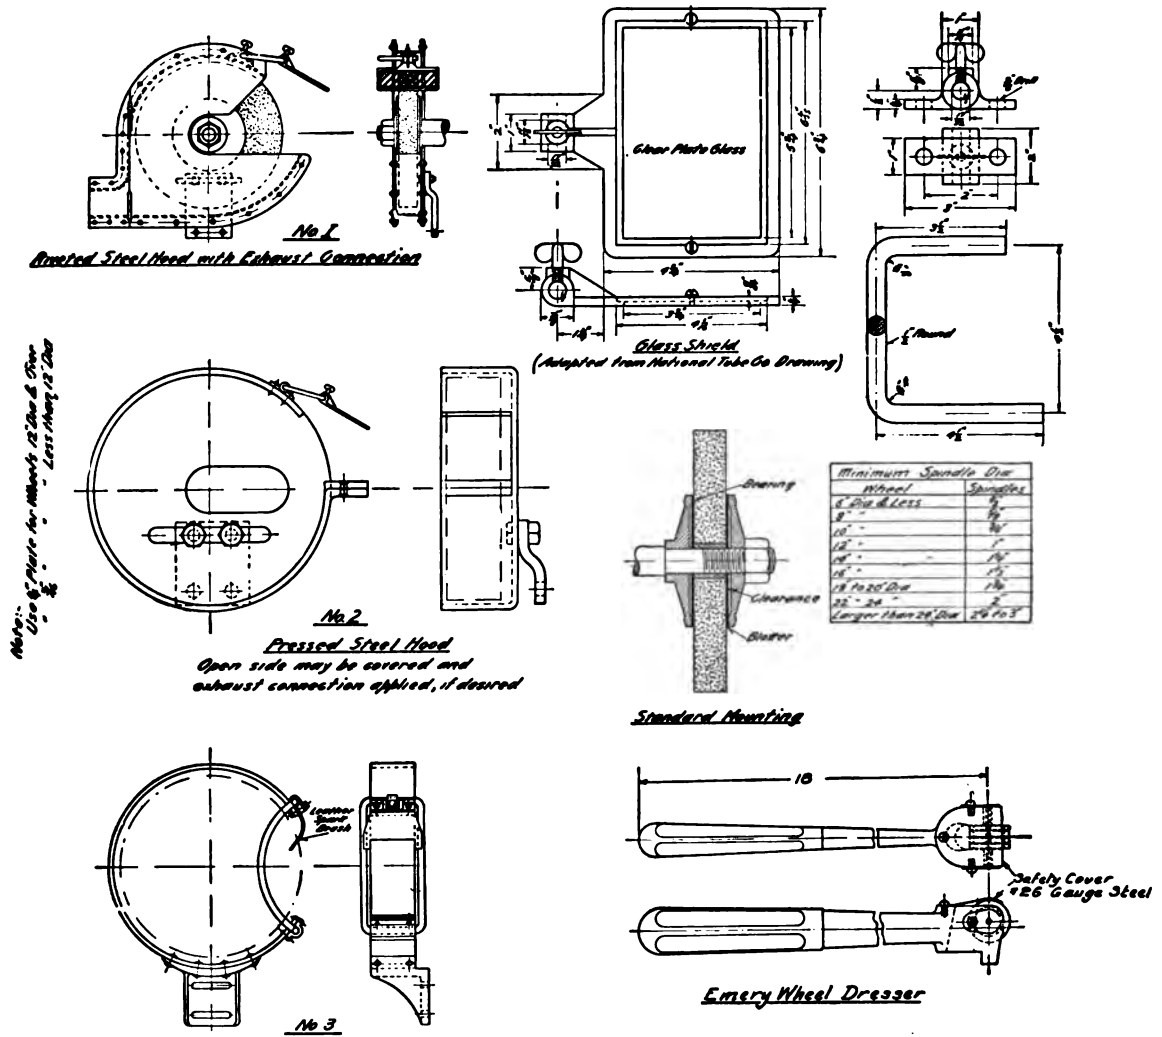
Hoods, Plate-Glass Shield, Safety Wheel Dresser, etc.
